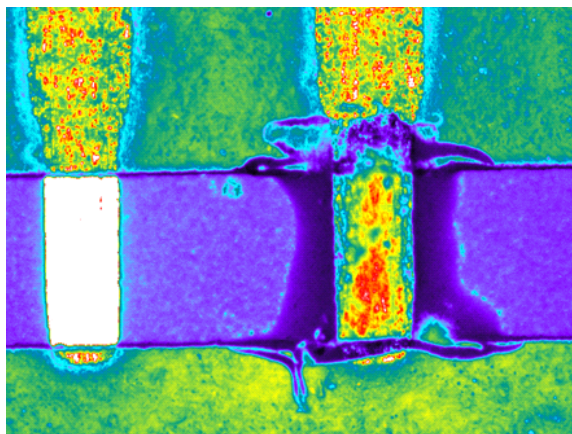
Representative Solder Pads Covered with Solder Mask in Pseudocolor.
